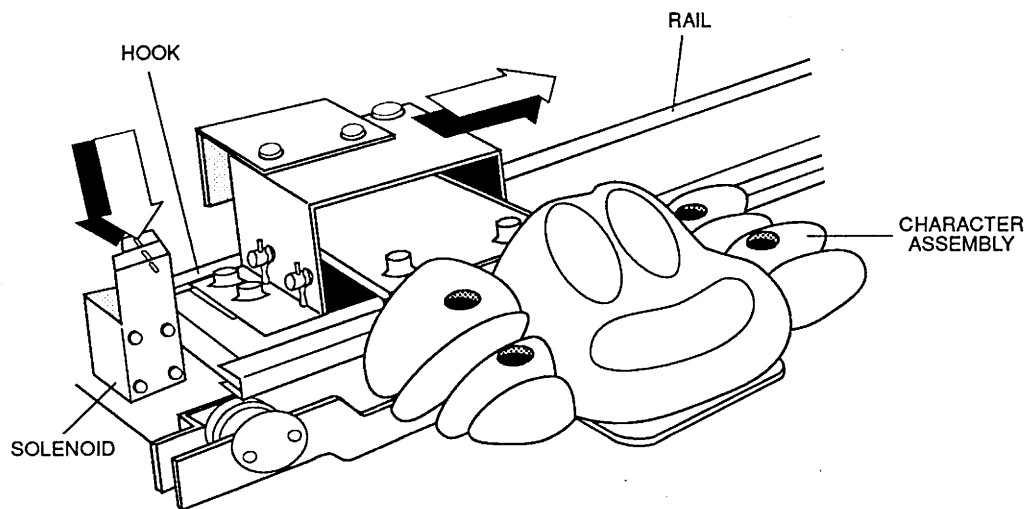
, CRAB CHARACTER ASSEMBLY
